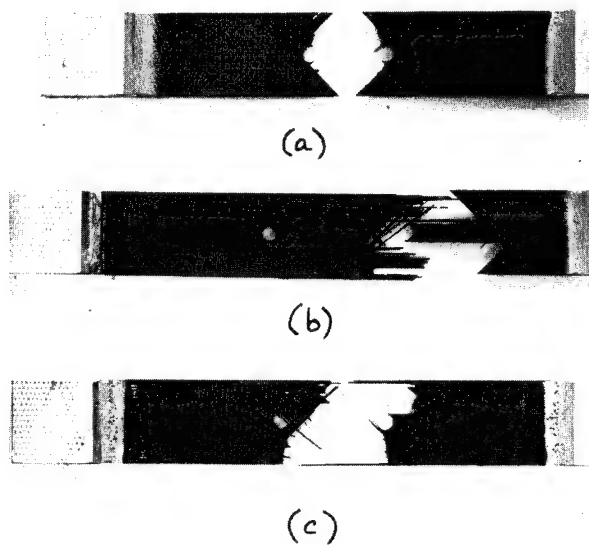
Tensile Fatigue Specimens D (3 Hertz);
